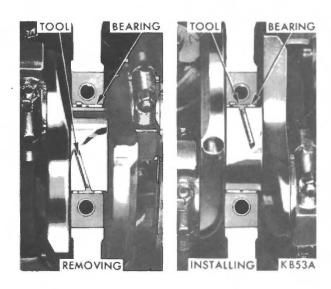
Removing and installing upper main bearings (Tool C-3059).
